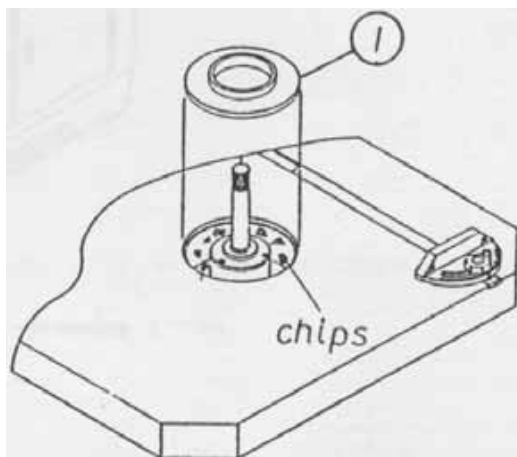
Remove the Working Table Ring to Clear Chips Away
